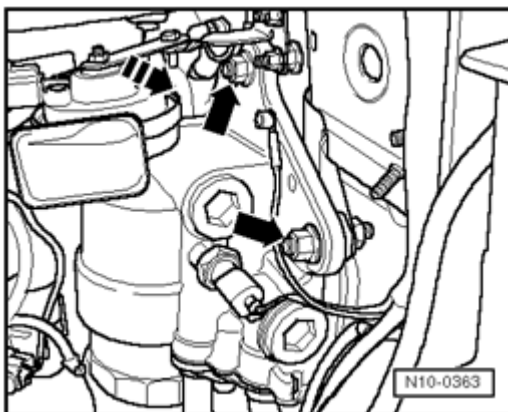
Loosening Oil Filter Housing At Longitudinal Control Arm And Securing To Connection Of Right Combination Valve
